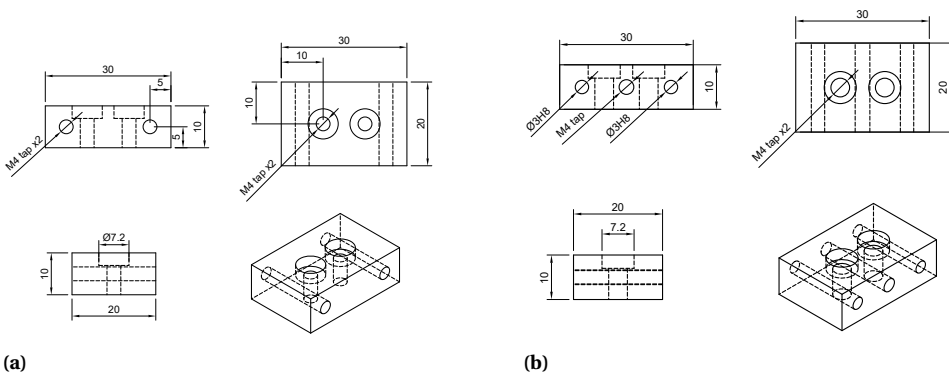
Technical drawings and dimensions of bottom blocks for attachment to base plate for constant (a) and variable (b) flexure sides
